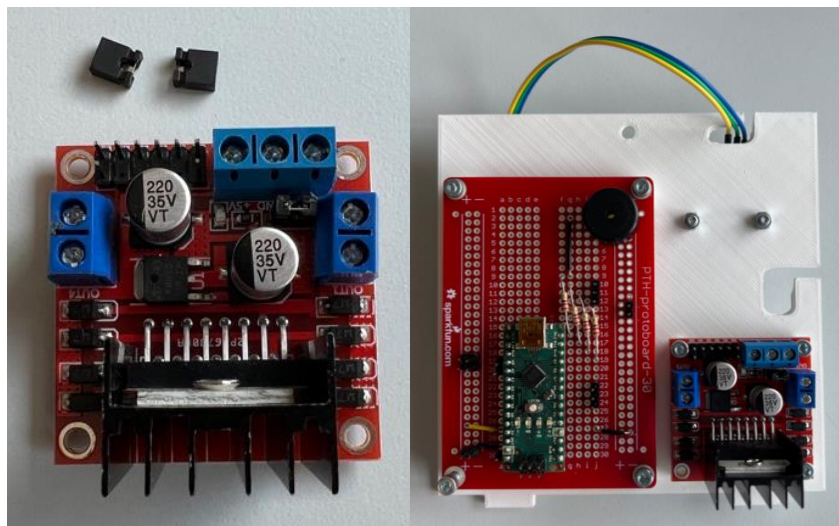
(Left) Motor Driver with jumper pins removed. (Right) Components assembled on the Hole Grid.
